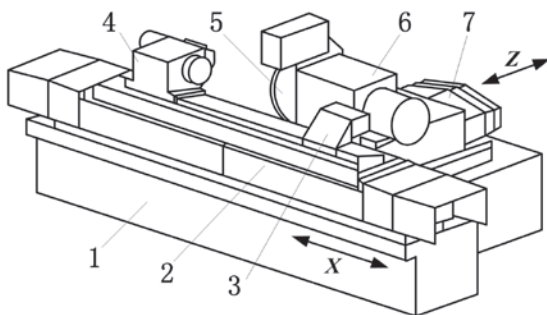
Schematic diagram of CNC grinder. 1-base, 2- slide carriage of axis Z, 3-tail bracket, 4-headstock, 5-grinding wheel, 6- spindle box, 7-slide carriage of axis X
